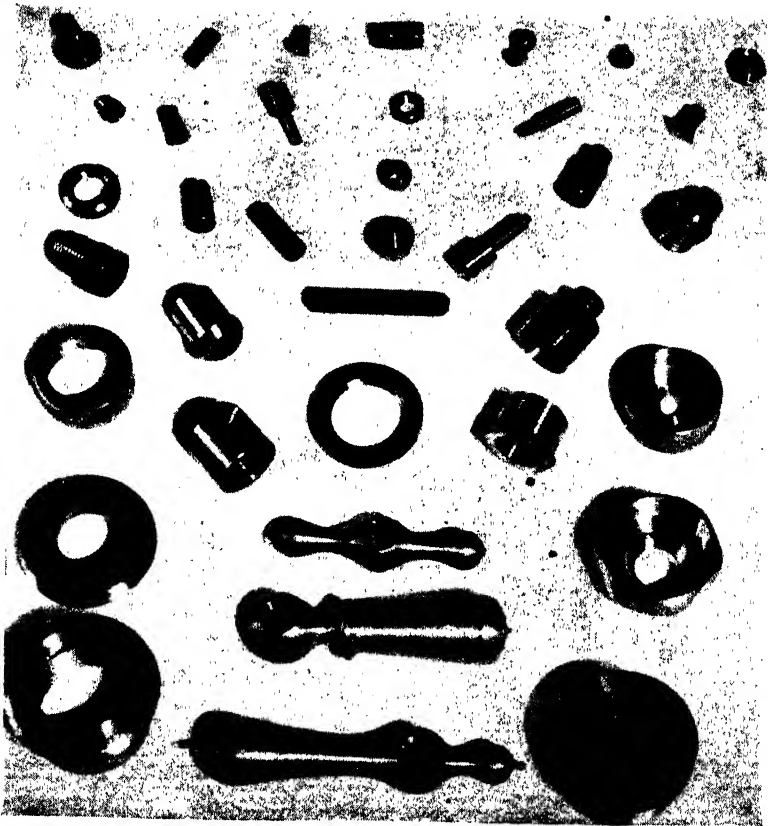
Group of automatic screw-machine products such as are extensively manufactured from free-cutting brass rod. The three faucet handles still retain the burrs left where cutoff occurs, but these are removed, of course, in the finished product.
